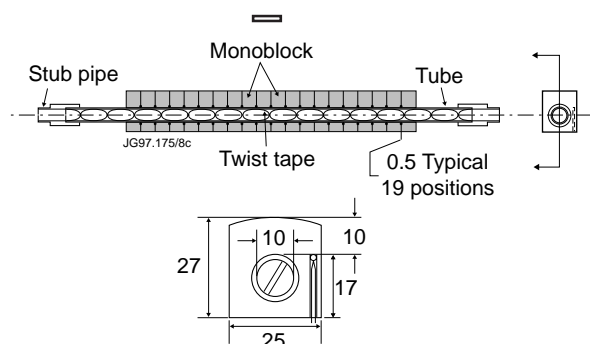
Schematic of the test section: Beryllium monoblocks are brazed to copper cooling pipe. The full length of the test section is exposed.
